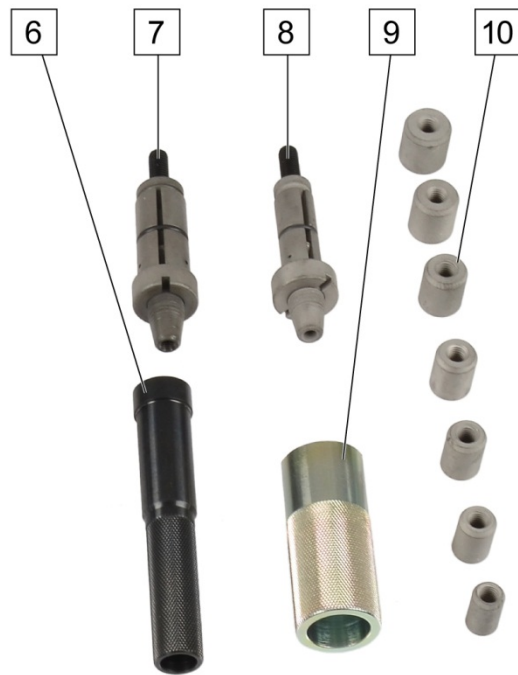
Guide pin, tensioning spindles, box wrench, guide pieces
